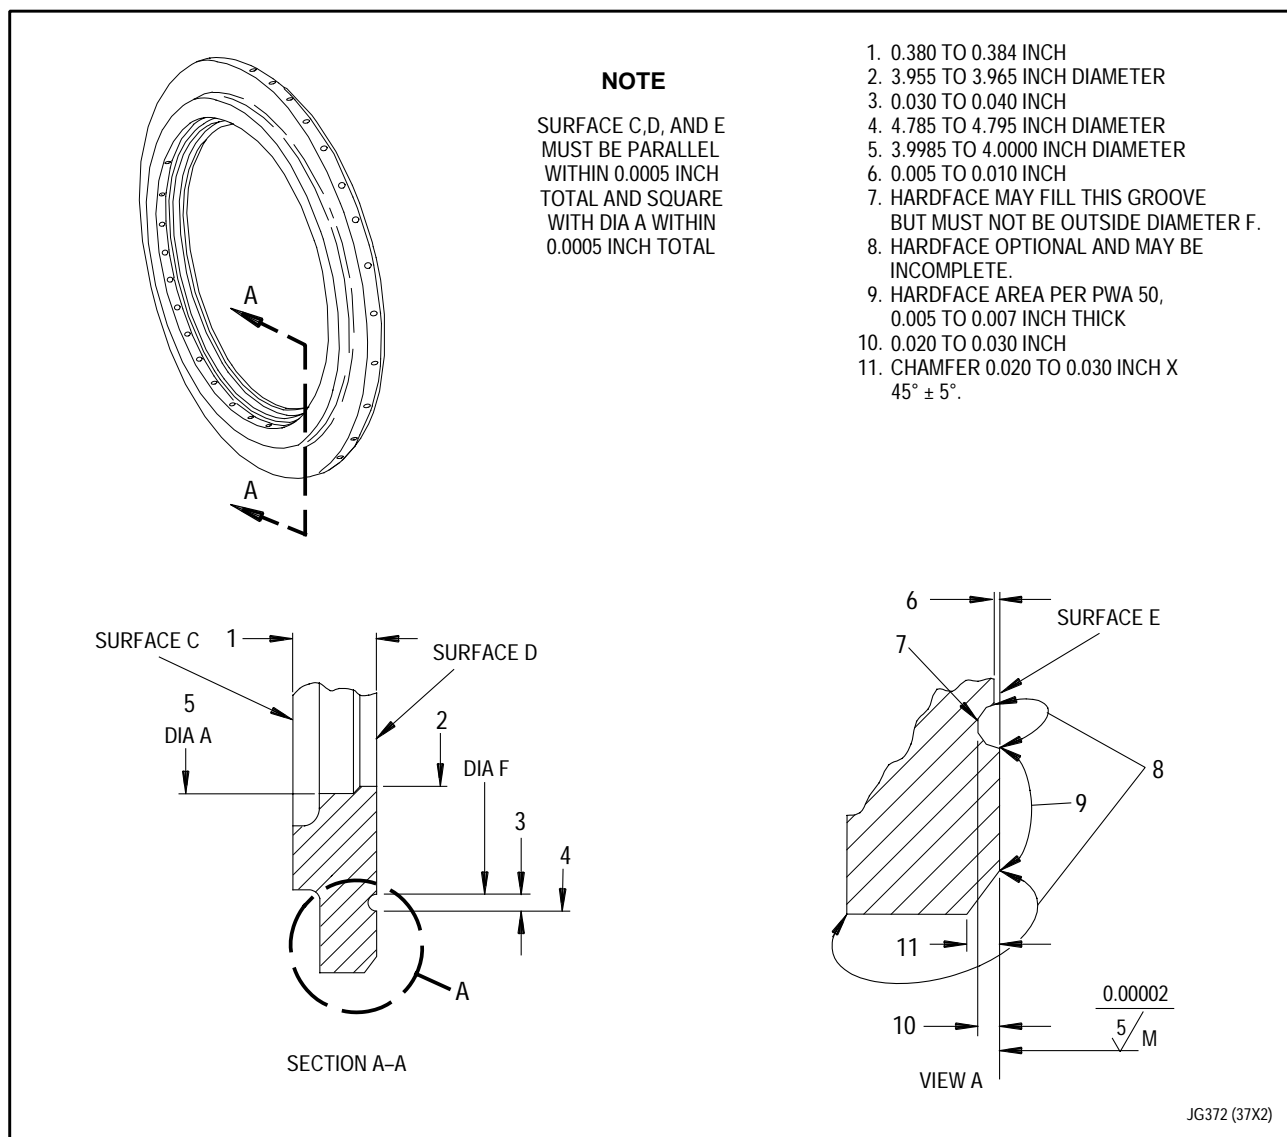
No. 2 Bearing Rear Seal Seat - Flame Deposition Coating and Lapping Repair (PN 4001529)
